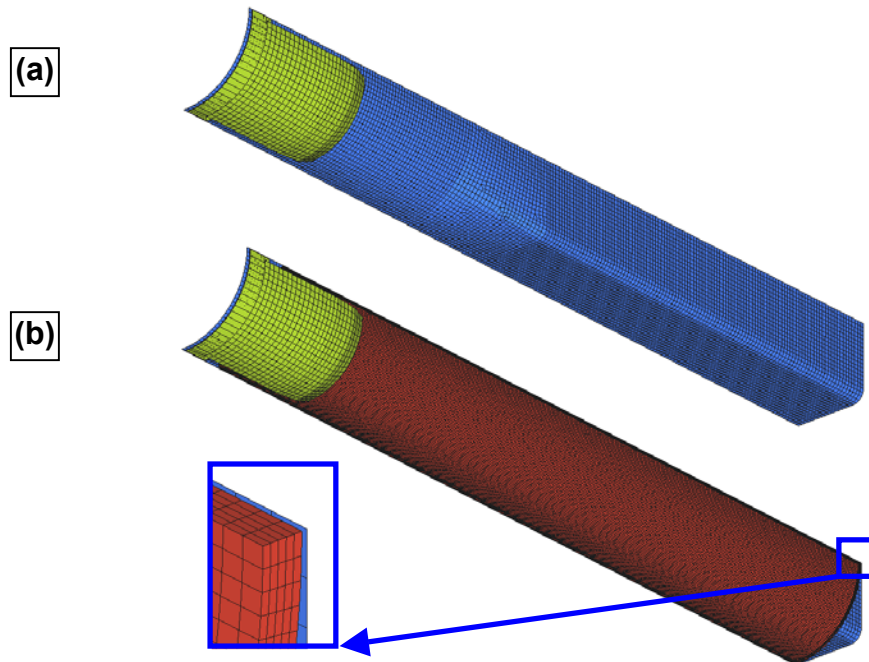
(a) hydroforming die and end-feed plug mesh; (b) tube, die and end-feed plug mesh
